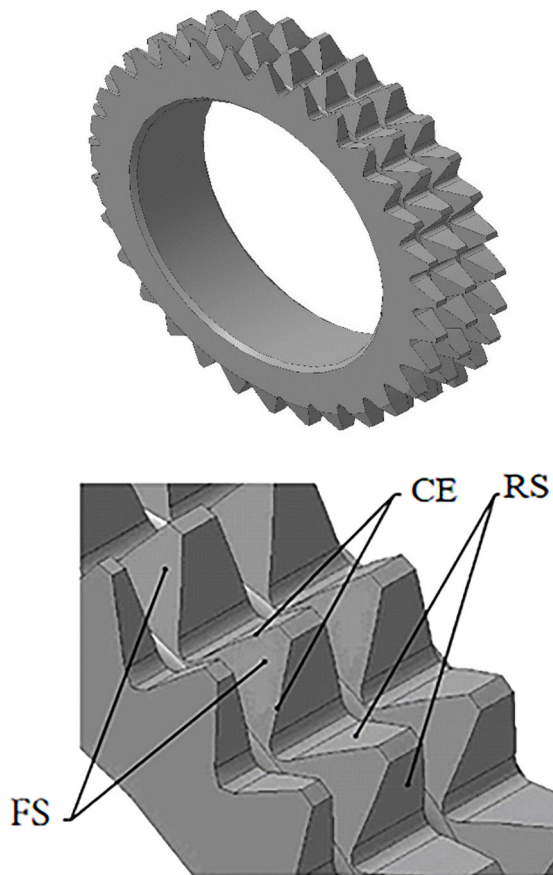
Solid model of a shave-roller for gear-cutting of a cylindrical gear with selection of elements of cutting teeth.
